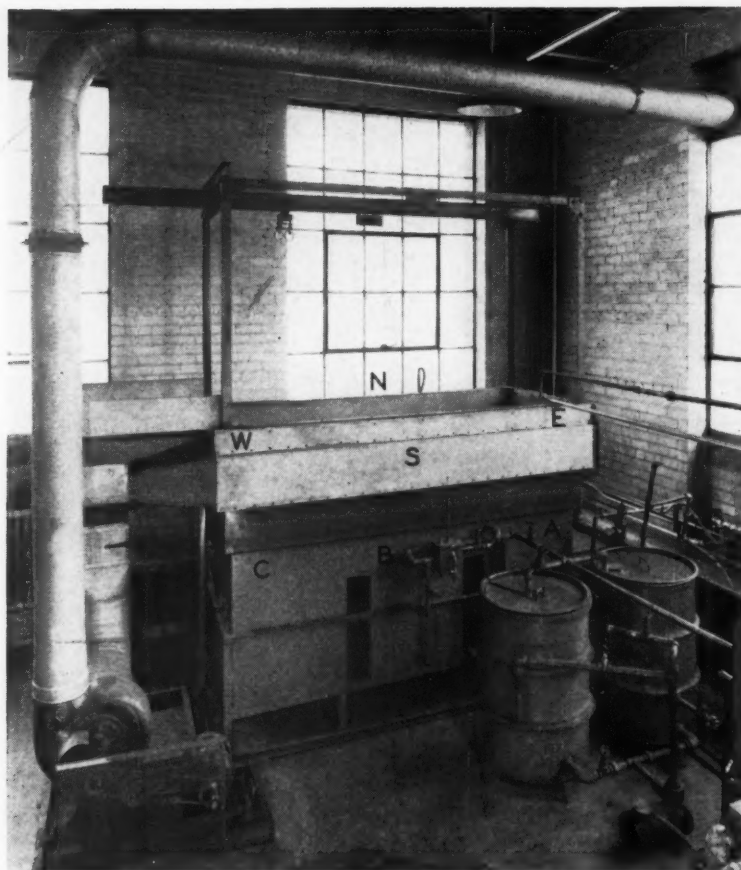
Side view of the degreaser with platform removed. A, boiling chamber; B, rinsing chamber; C, vapor chamber; N, north side; E, east end; S, south side; W, west end.
